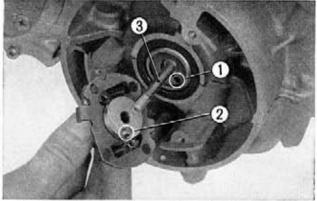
① Pin hole ③ Spark advancer shaft ② Spark advancer pin
